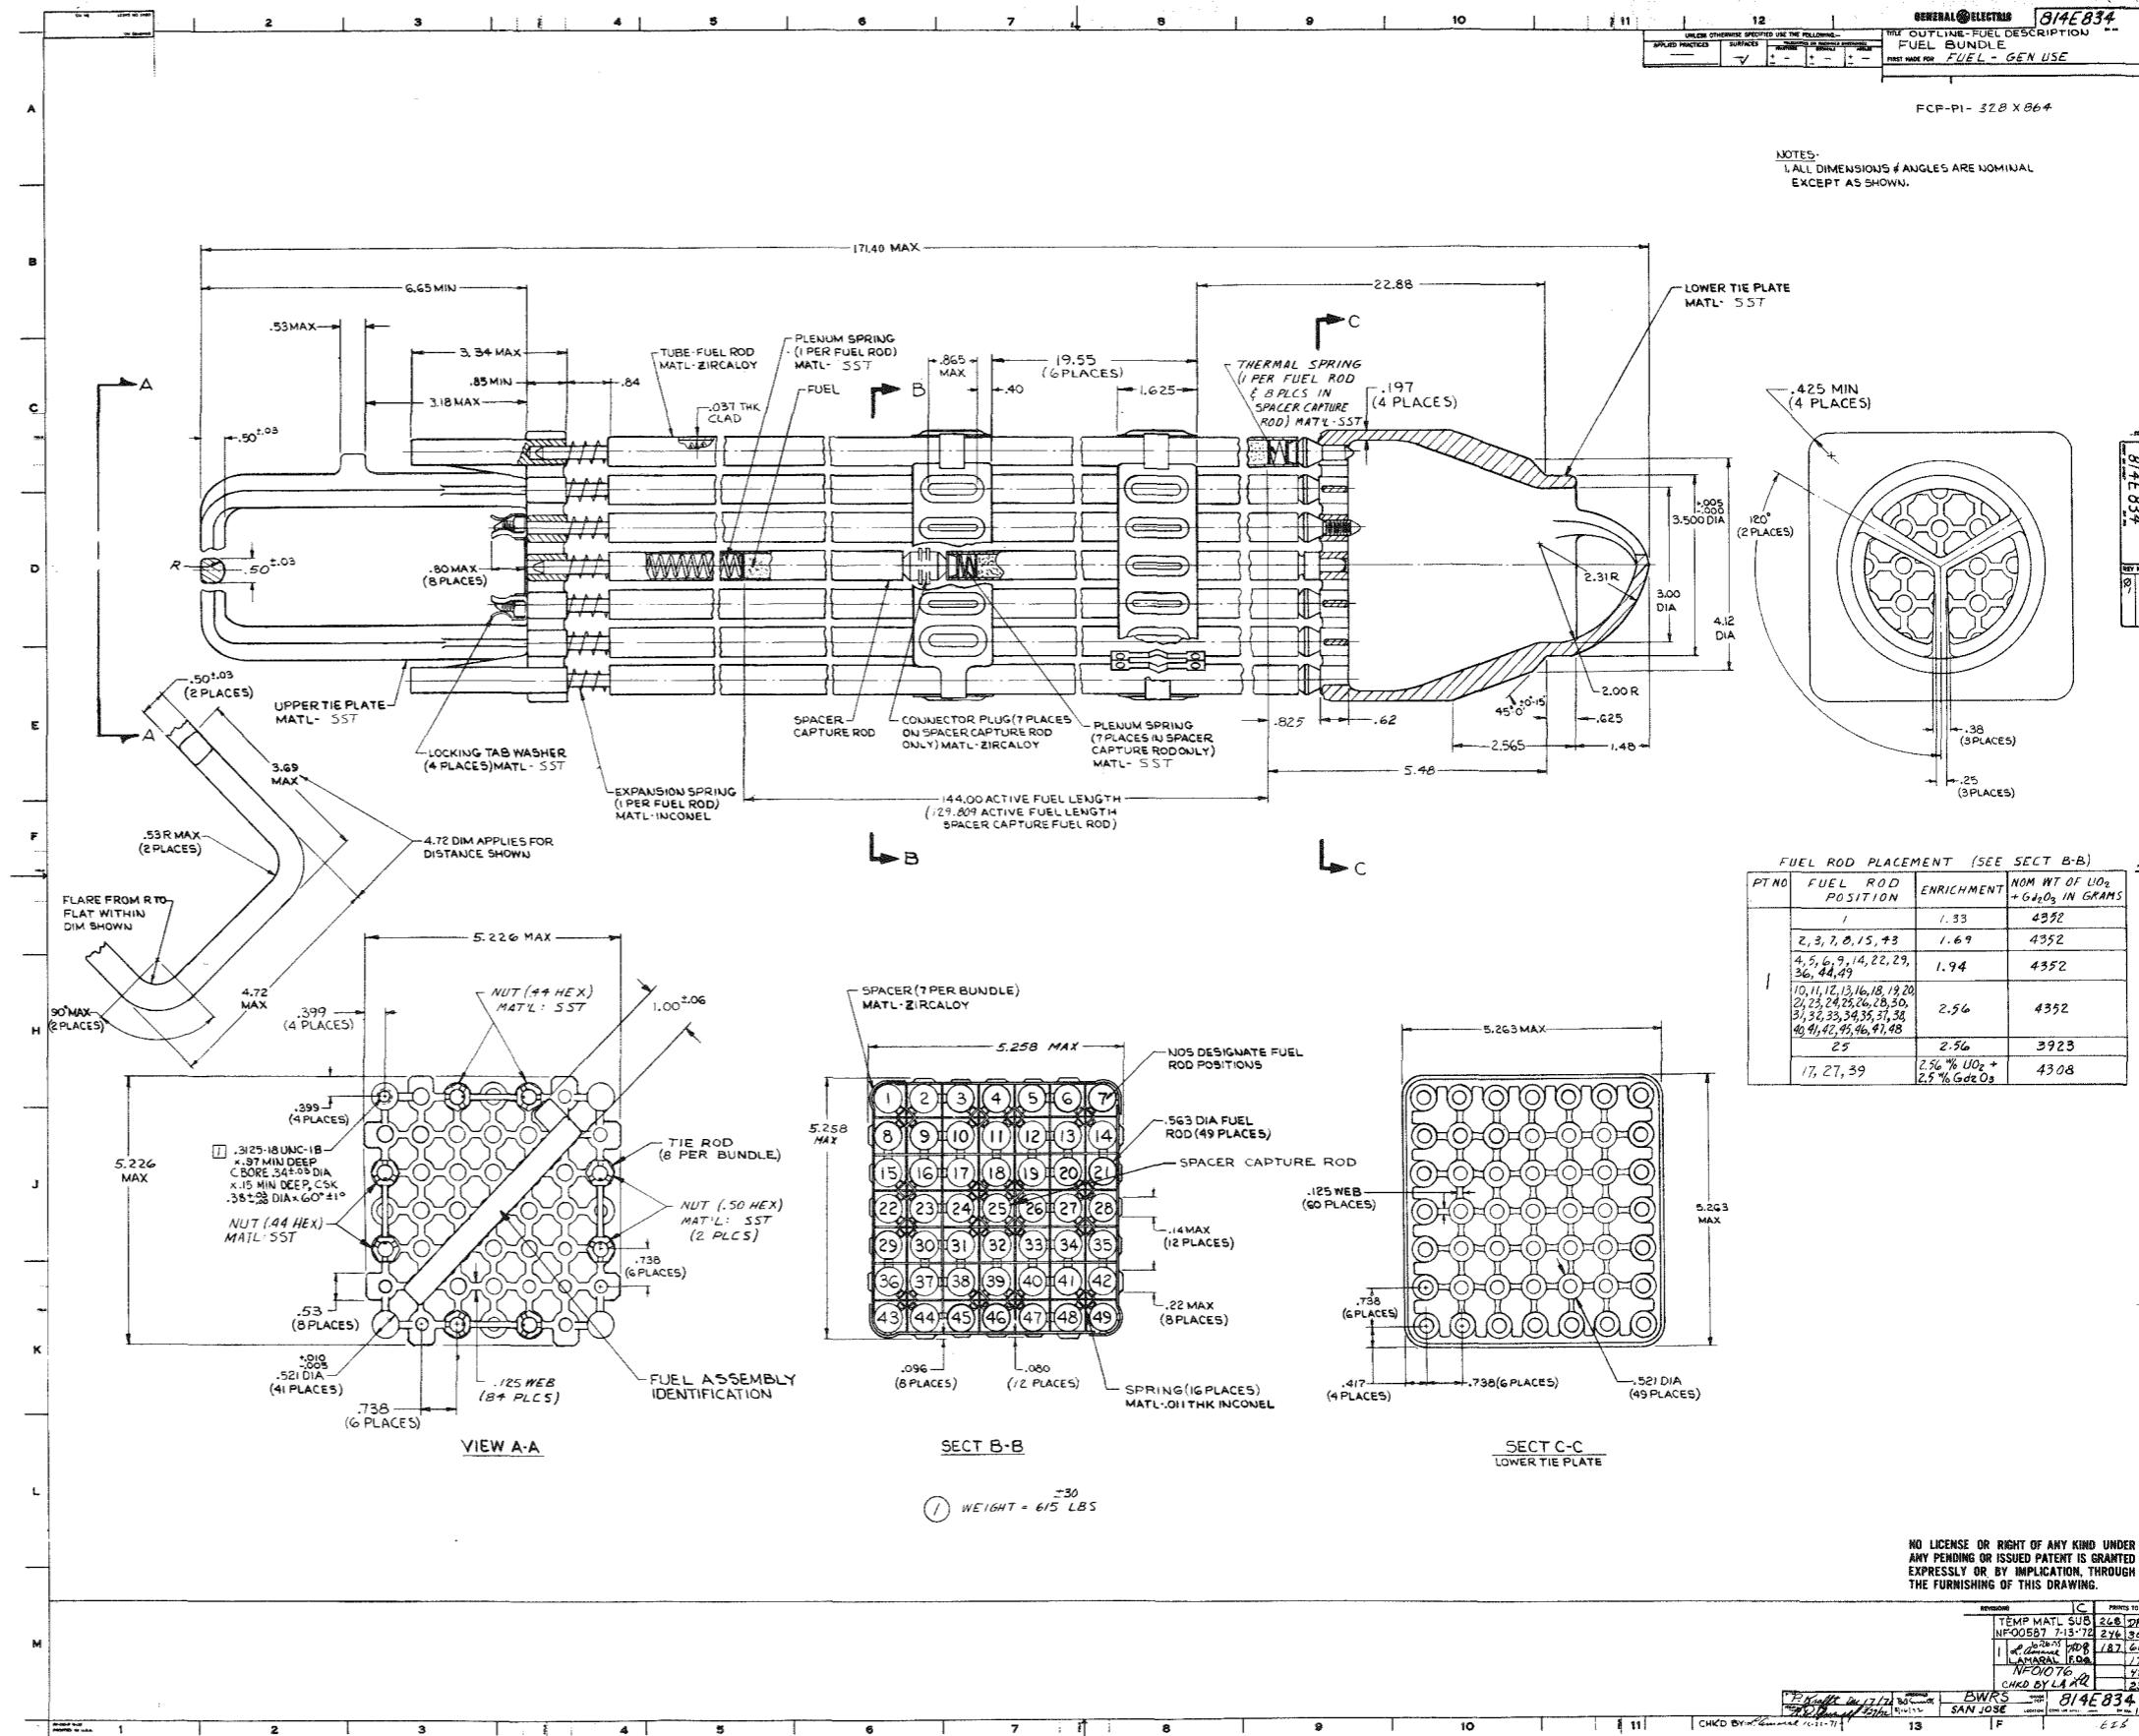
Fuel Assembly Drawing for 7x7 Reload Fuel
